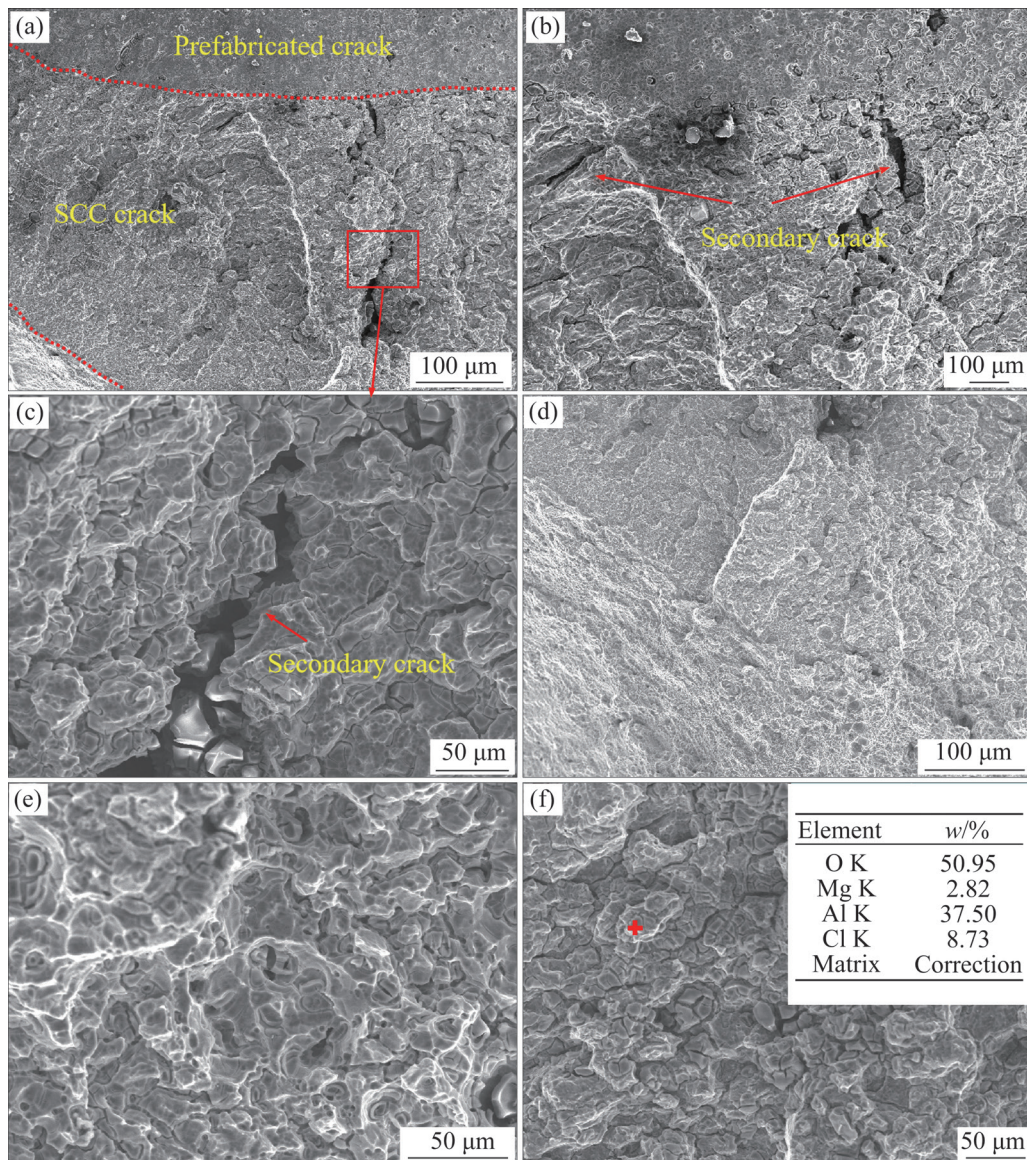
SEM Morphology of fractures of BM samples: (a) Fracture morphology; (b) Inside the fracture; (c) Secondary crack; (d) Outside the fracture; (e) Dimples; (f) Corrosion products
